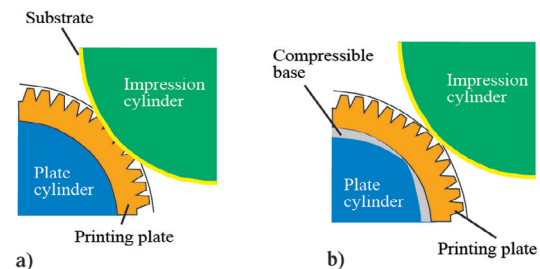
Flexographic printing with and without compressible layer on plate cylinder
